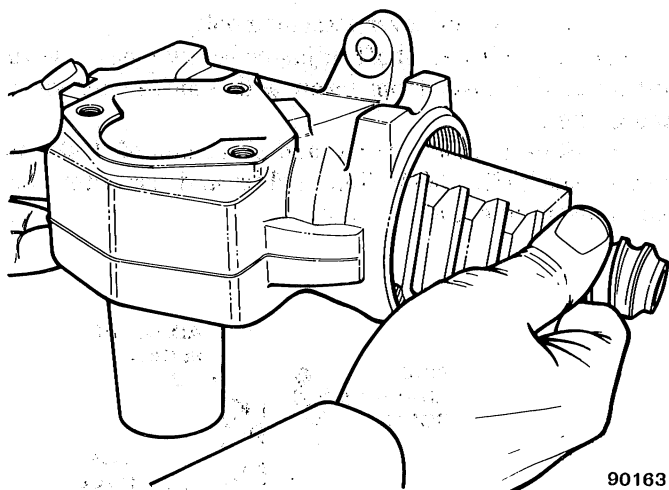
K-5 Wormshaft and Ball Nut Removal/Installation
